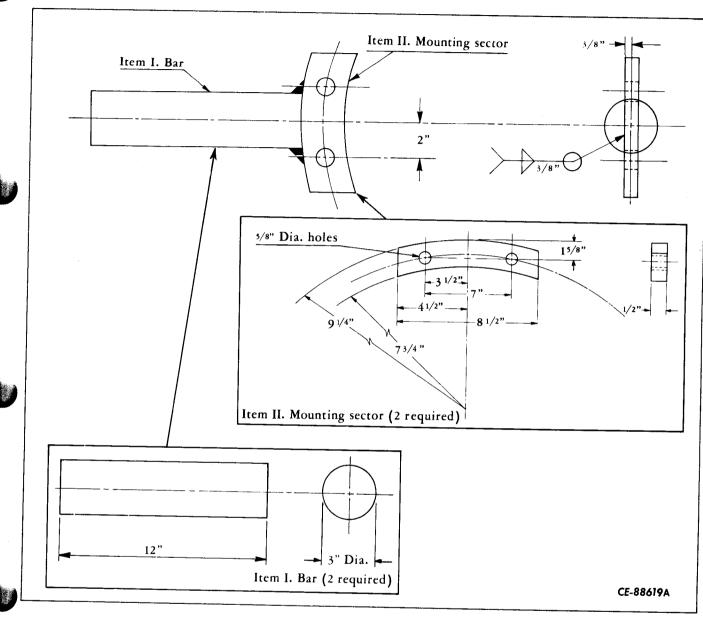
A. Swivel Weldment (2 Required).
